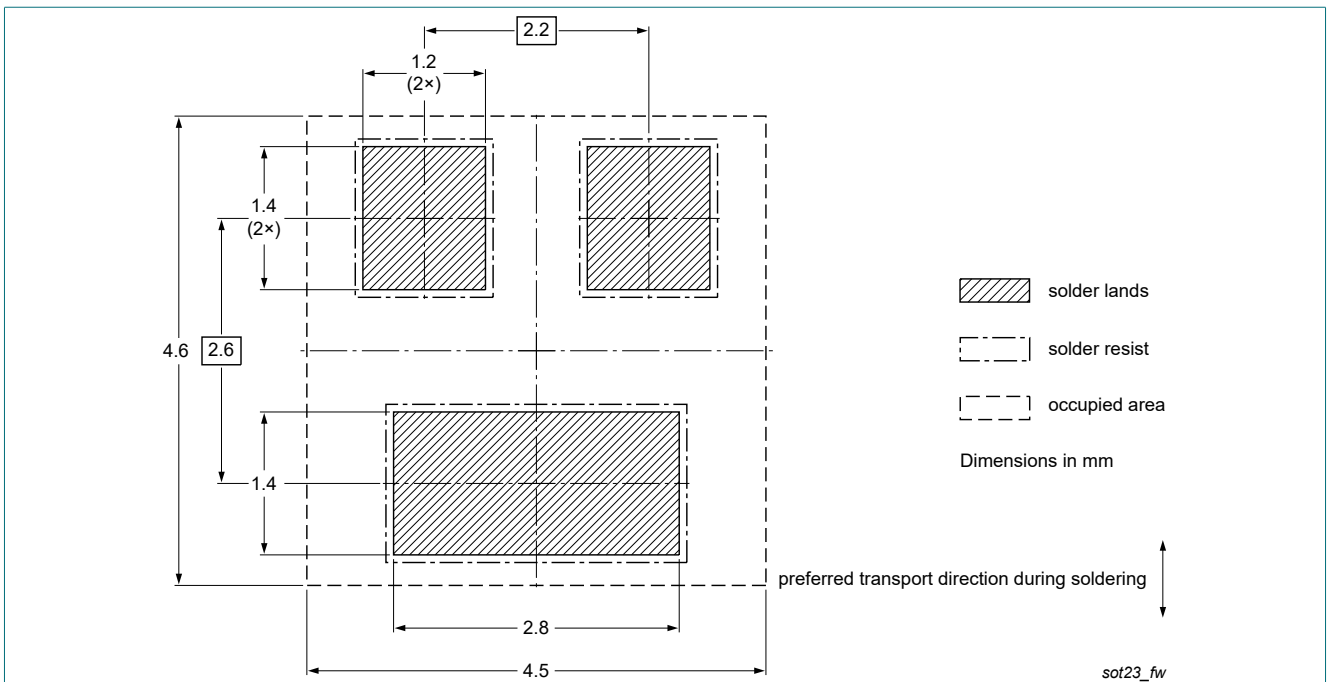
Wave soldering footprint for SOT23 (TO-236AB)
